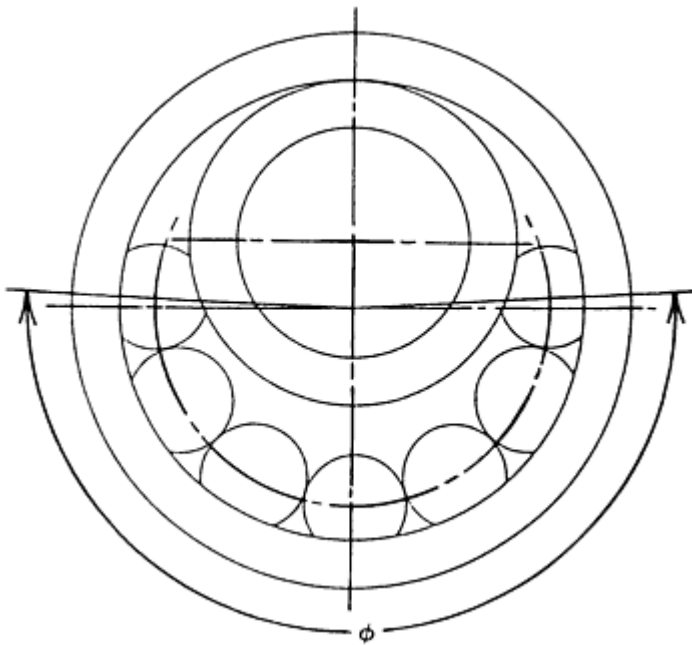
Schematic showing assembly process for a nonseparable Conrad-type ball bearing. ϕ , assembly angle
